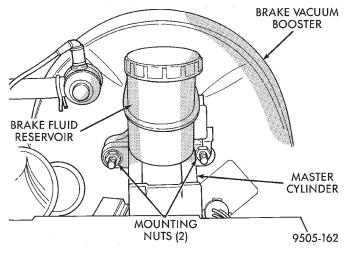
Master Cylinder Mounting To Vacuum Booster
